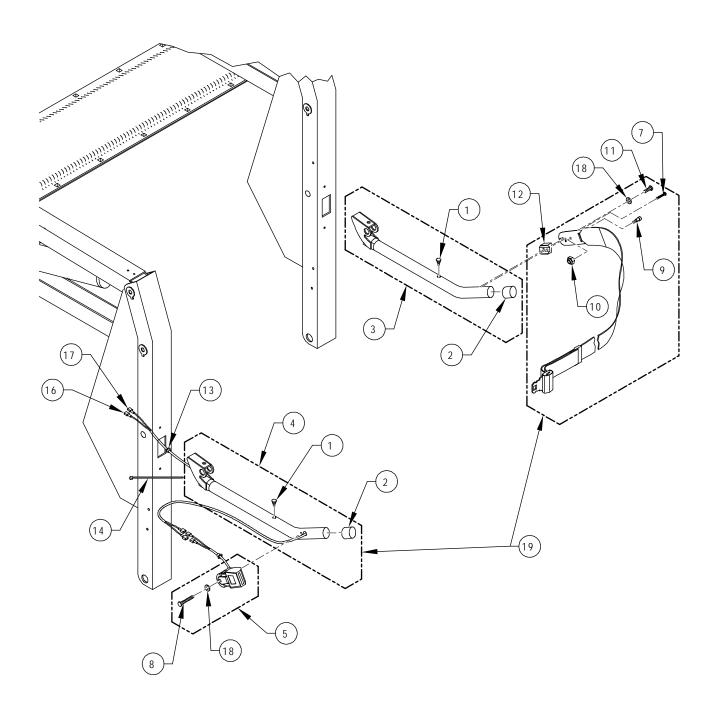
ADA TRANSIT USE STANDEE HANDRAILS
